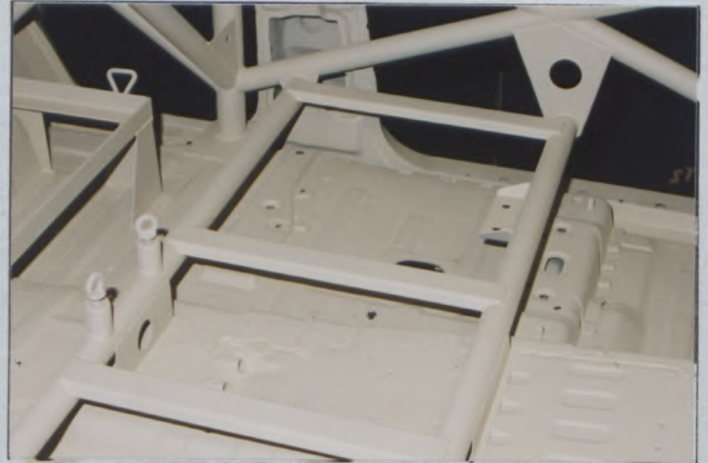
SEAT BRACKET AND LONGITUDINAL
